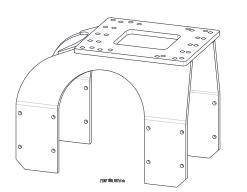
Flat-Top Frame with MR / LR8 Bolt Pattern
